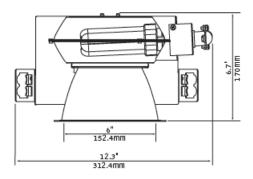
Recessed can light fixture housing and lamp [Focal Point].
